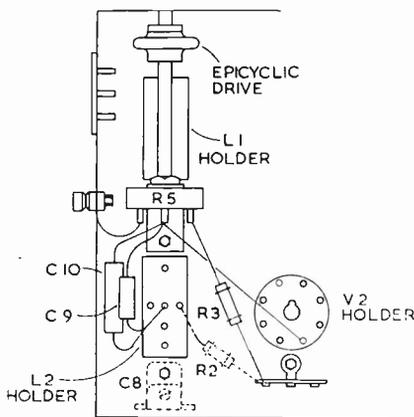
Mounting of the parts on the RF side. This drawing should be examined with Fig. 2.
